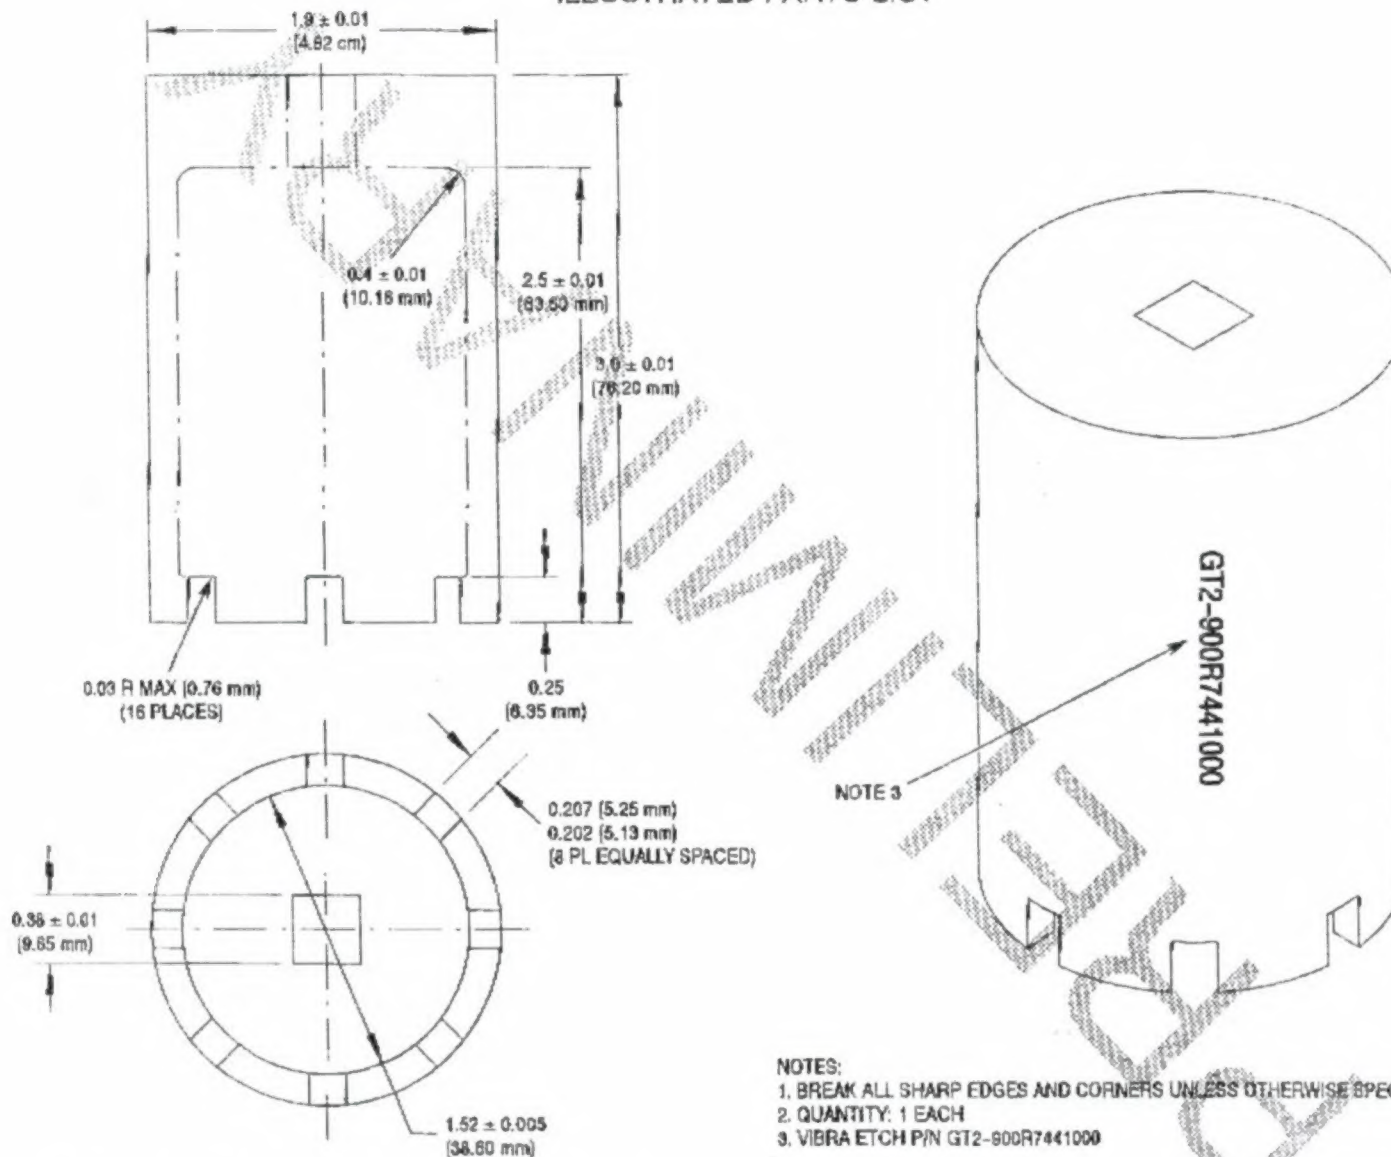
T604 Anti-Torque Bearing Grease Tool - Field Fabricated
